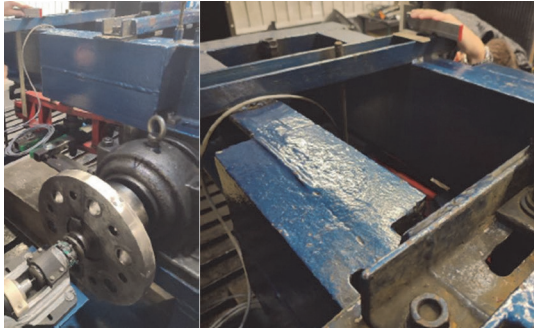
Measurement of the distance from the bearing housing to the edge of the „U“- beam edge: left side (left), right side (right)
